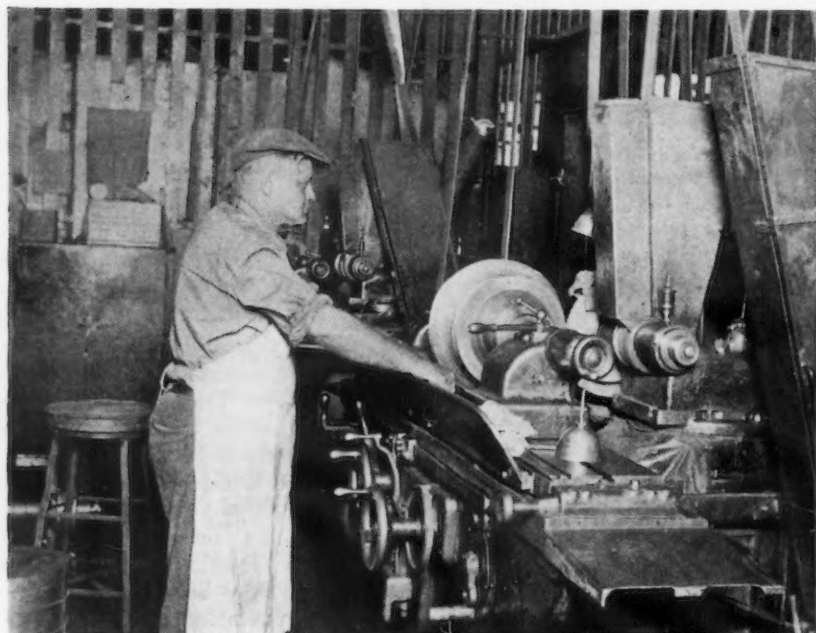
The heat-treated alloy steel rolls used for rolling rims are finished by grinding on this 14 x 48-in. universal grinder machine.
